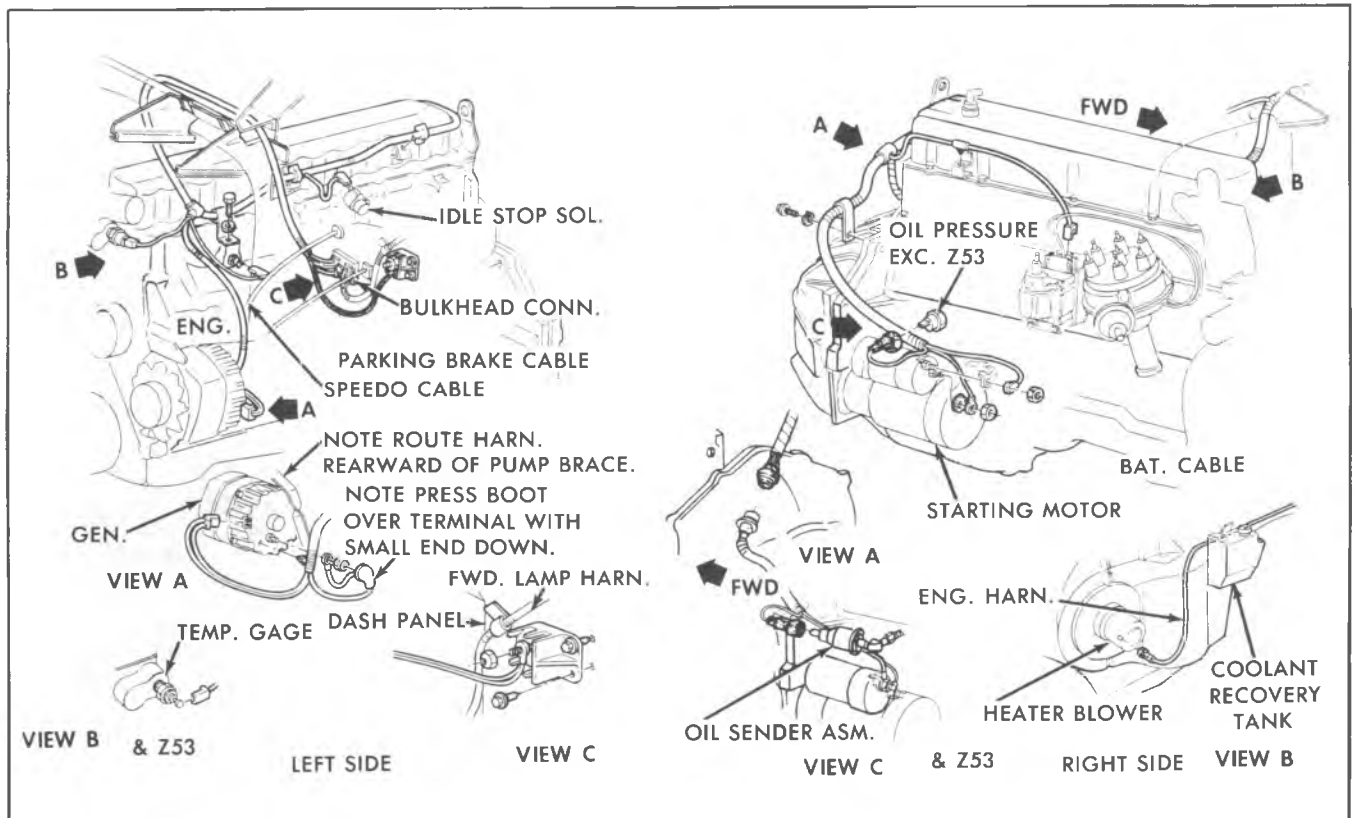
G-10 thru 30 Truck L-6 (LD4) Engine Wiring
